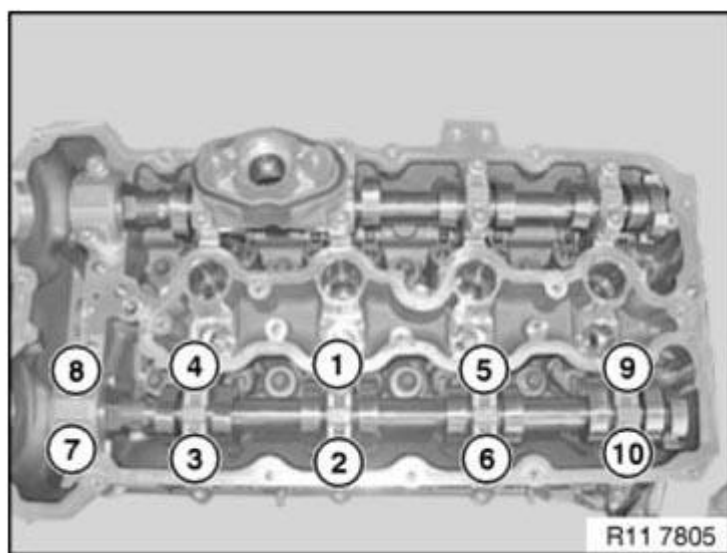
Identifying Camshaft Bearings Bolts Tightening Sequence
